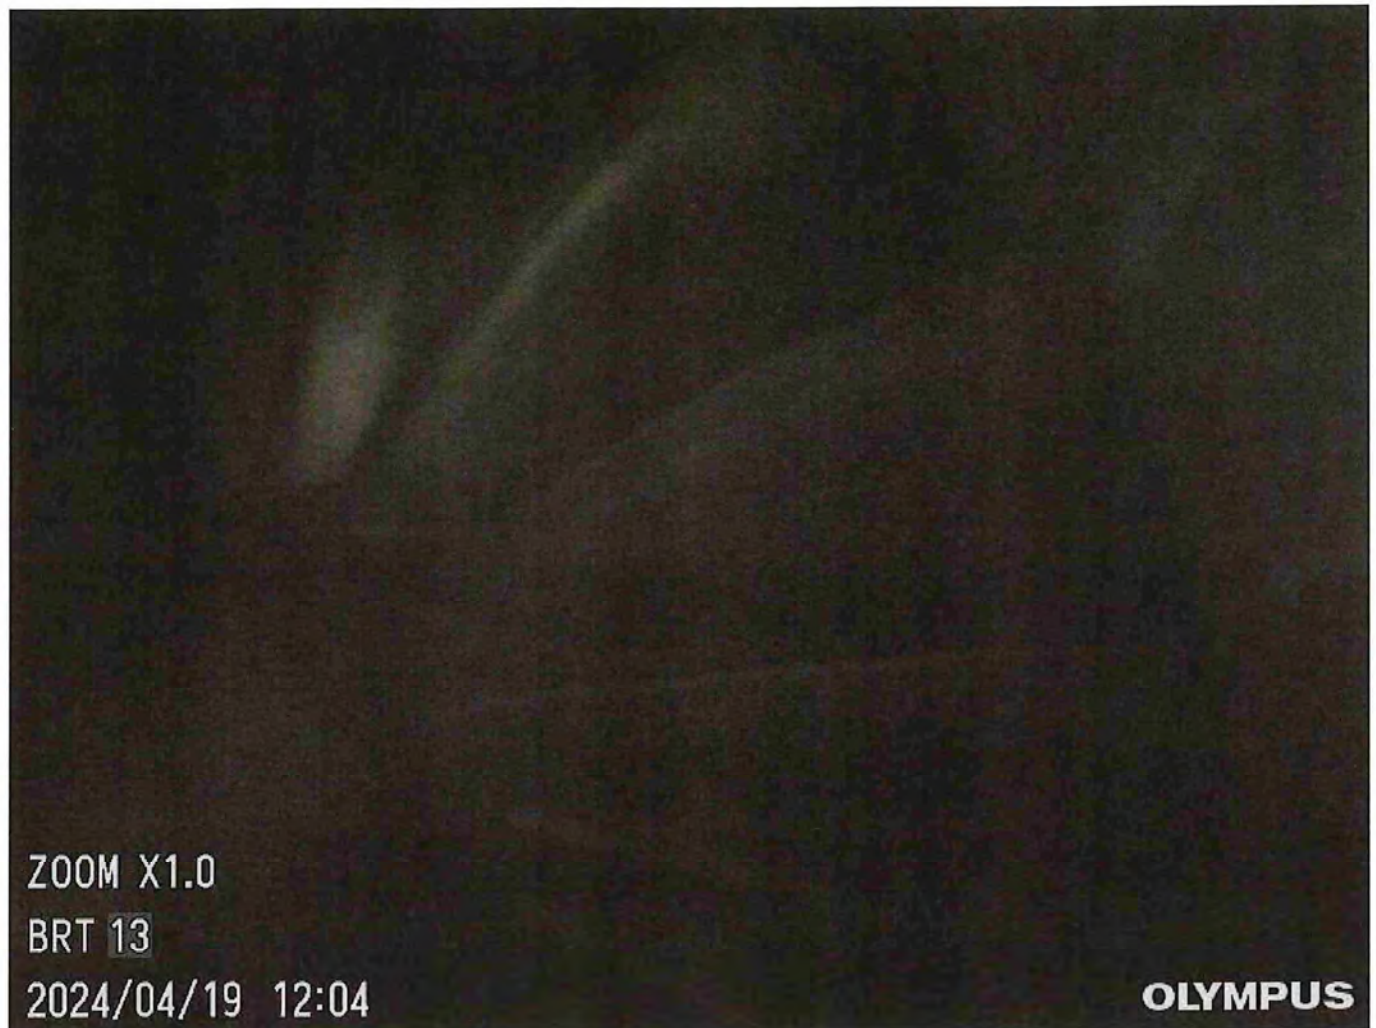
Borescope Pictures: Blade Tips of Load Compressor Impeller.
